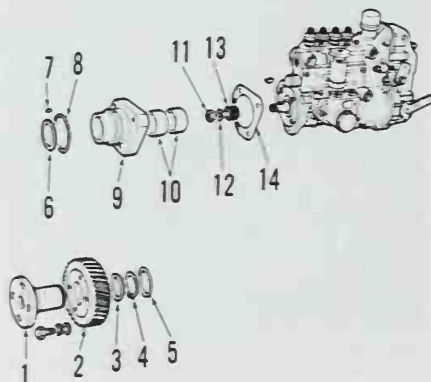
Exploded view of fuel injection pump drive assembly on Models 834 and L54.
